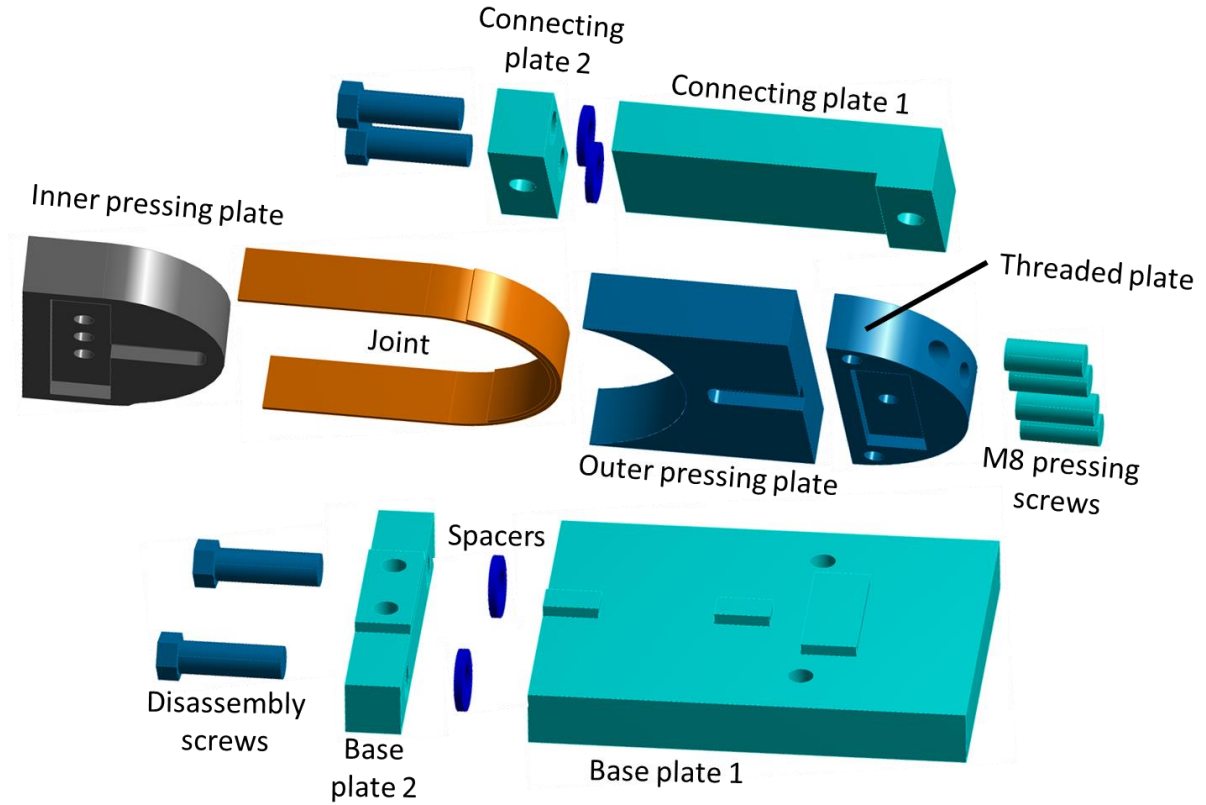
Exploded view of the diffusion-bonding clamp#2. In blue and light blue the Inconel parts, while in grey the steel ones.
